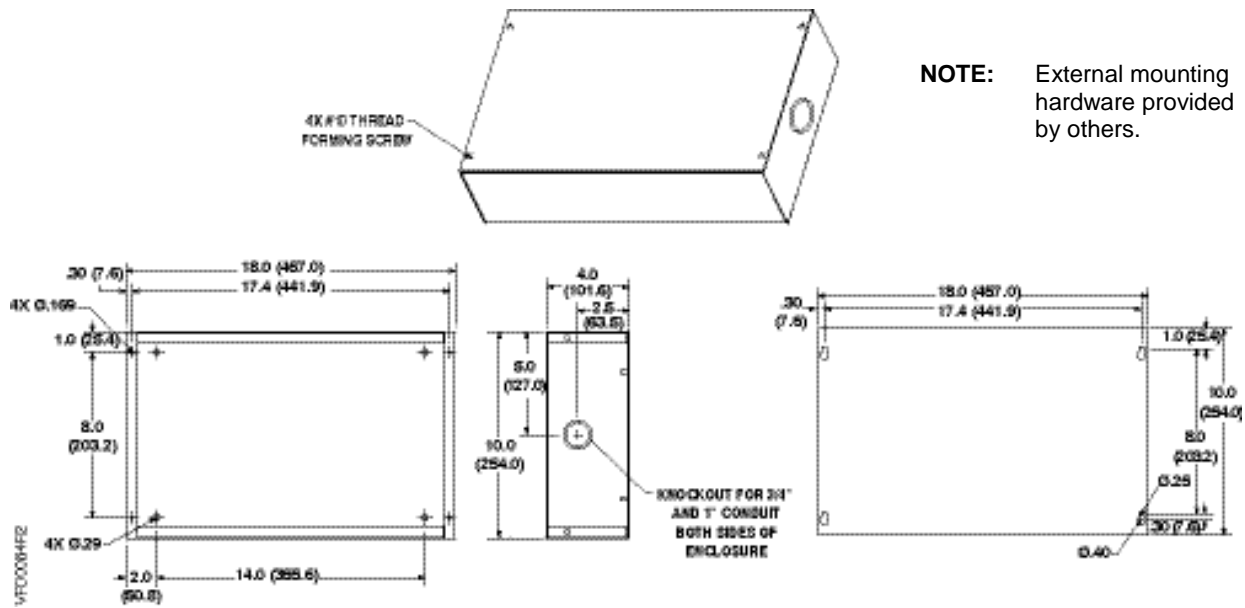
Filter Dimensions for Bypass Frame Sizes A, B, and C. Dimensions in Inches (millimeters).
